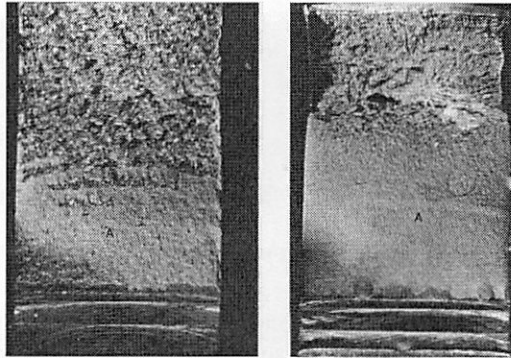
cleavage fracture left, and ductile fracture right, both initiated by fatigue crack
